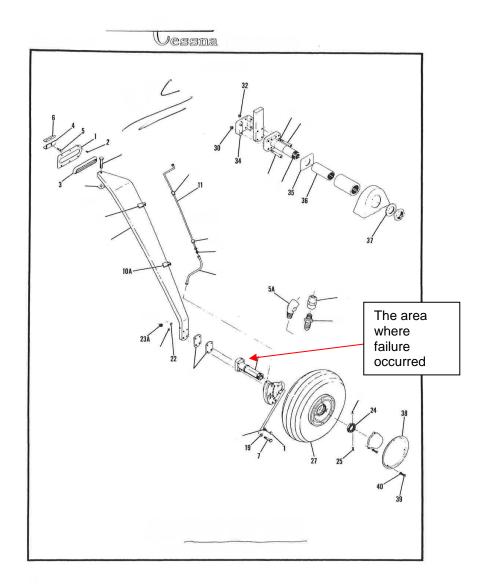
Illustrated parts catalogue of the main gear strut and wheel assembly.
